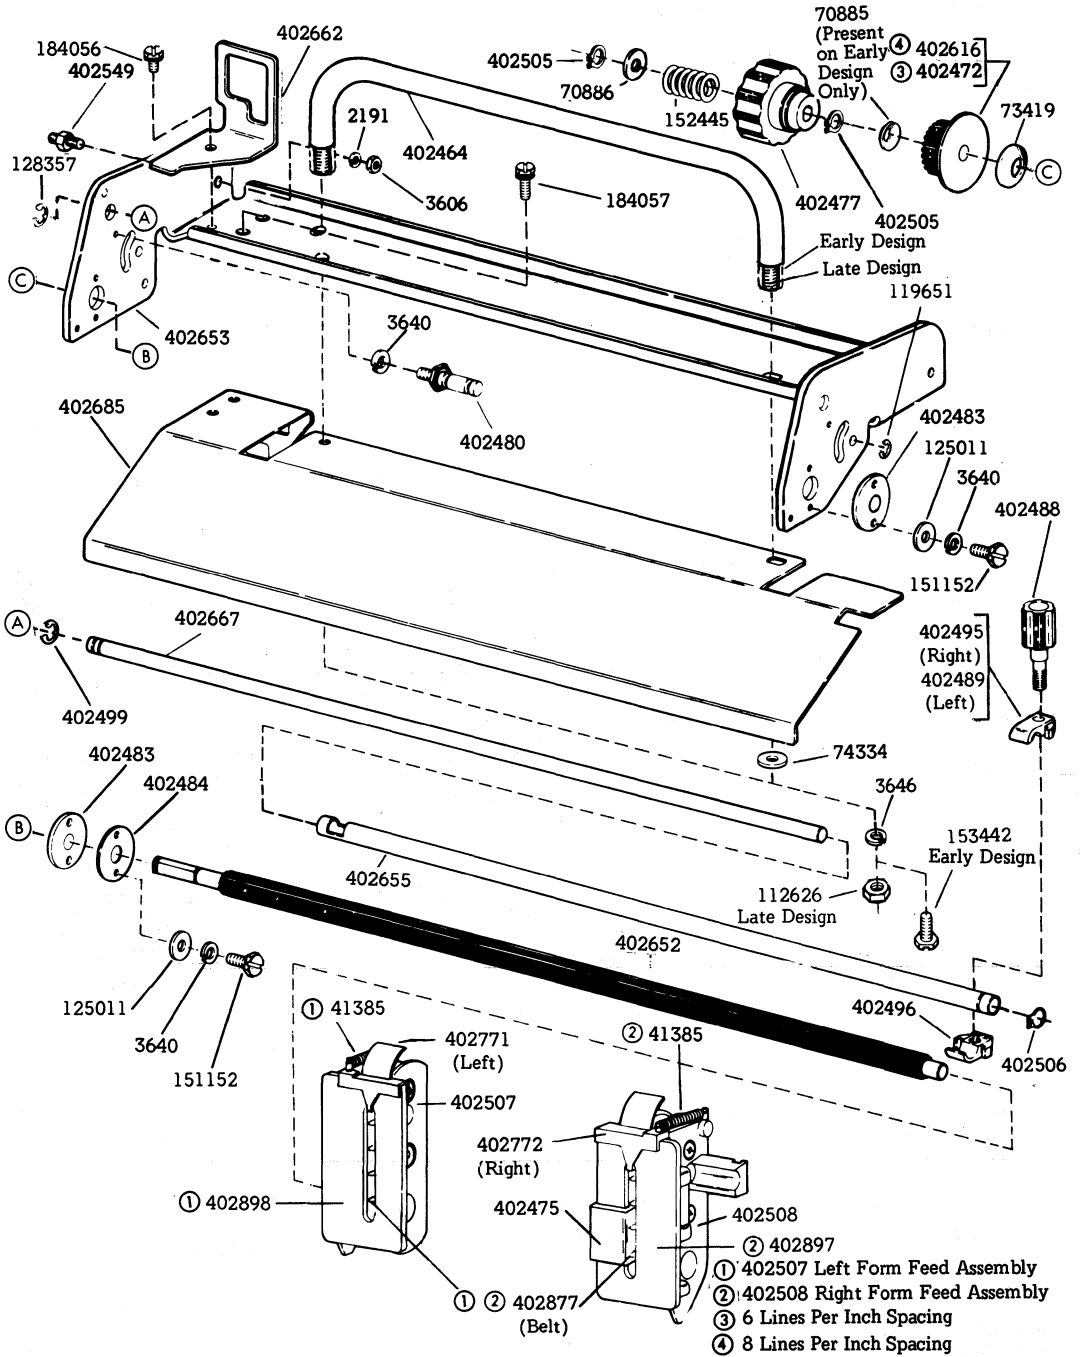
Paper Handling Assembly (Tractor Feed - 132-Column)
